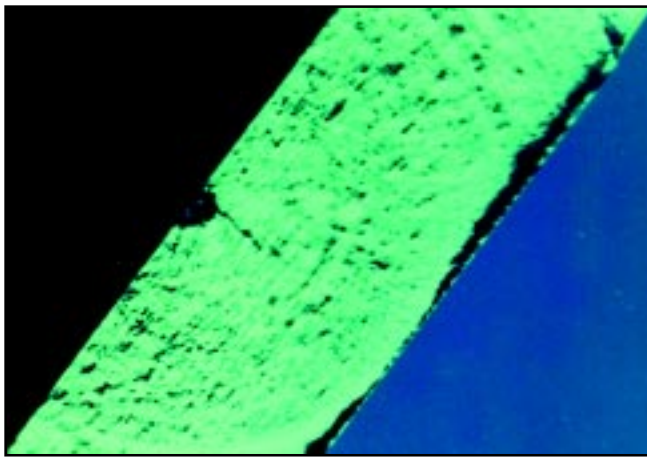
The fatigue crack that led to the failure of this component initiated at the active corrosion pit shown at the left center of the photograph
